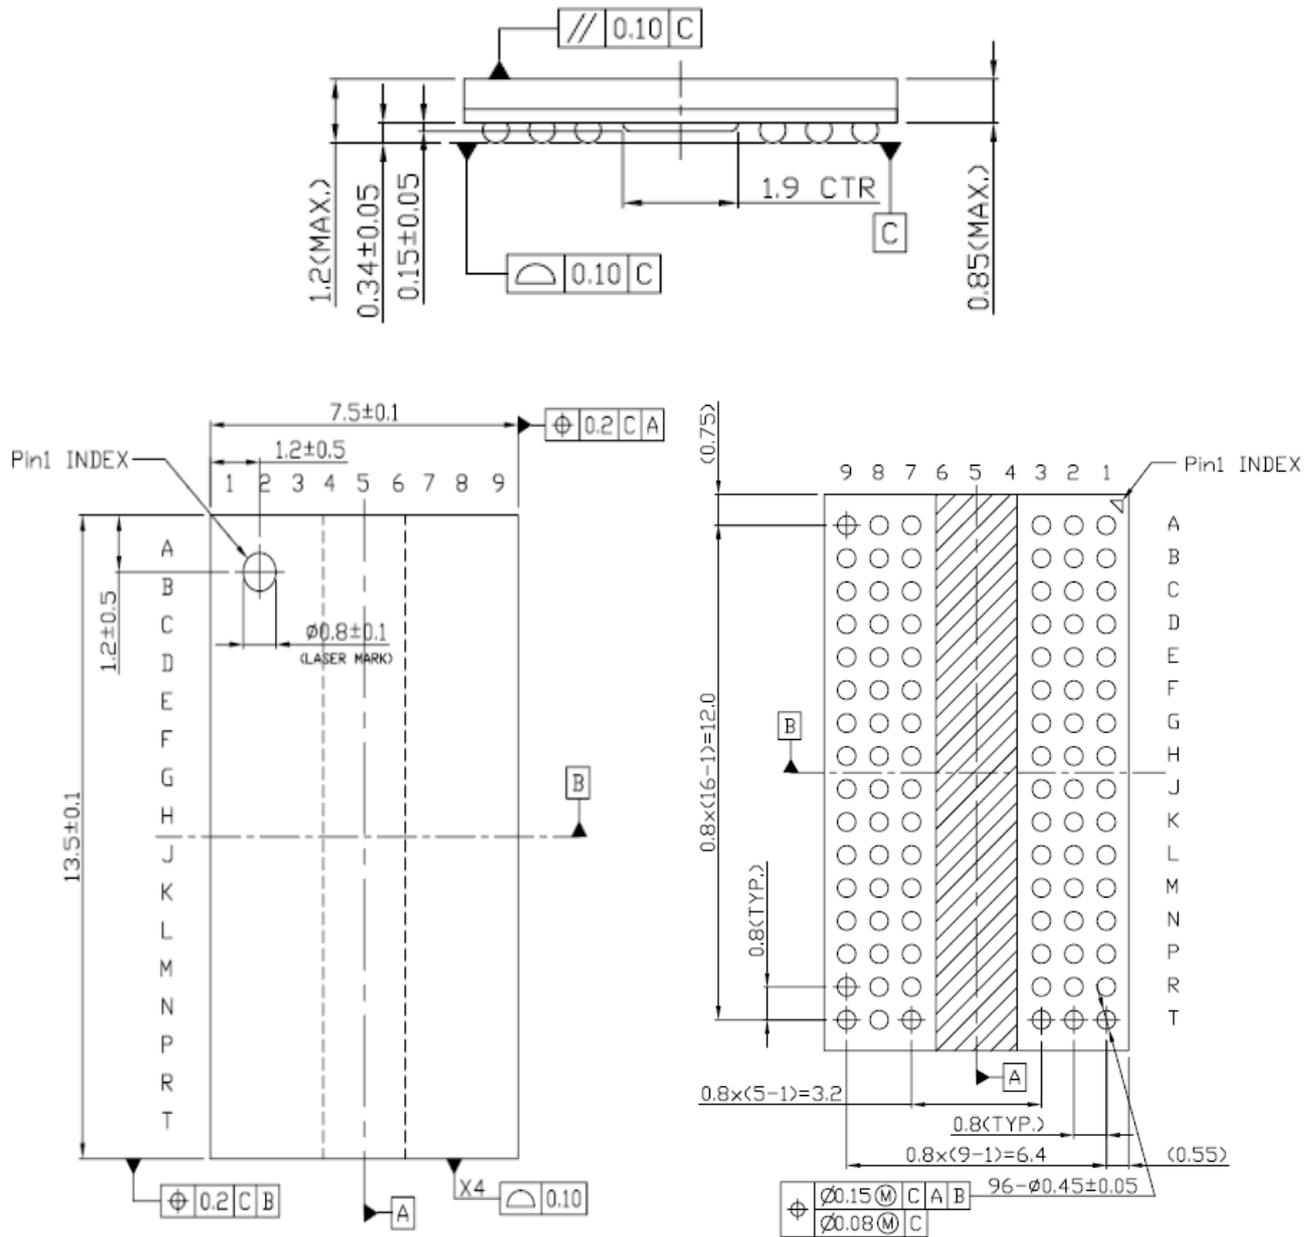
FBGA 96-ball package outline drawing (unit:mm)
